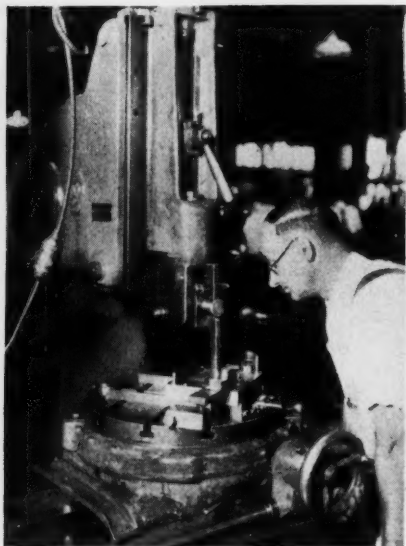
(Left)—This Pratt & Whitney vertical shaper is one of the busiest machines in the shop. Fig. 3 (Right)—Trying out a new jig. This light radial drill is handy for trying out new tools to see how they will work in production.
